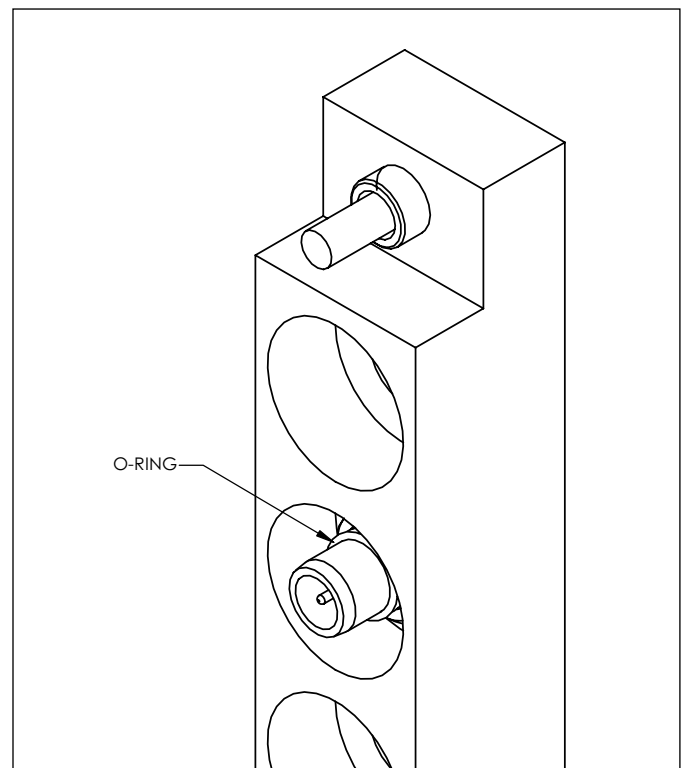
B. The o-ring provides a bulkhead seal during receiver and ITA engagement.
